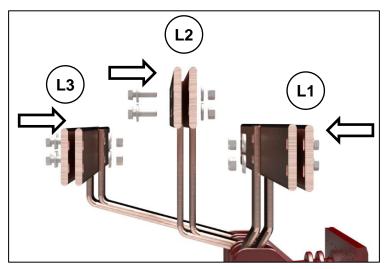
Side view of 2500 A busbar assembly, feeder 1600 A – 2500 A, Ur  $\leq$  12 kV
